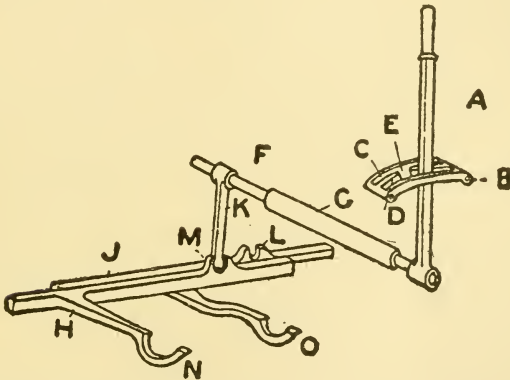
View of gear shifting lever, selector, and operating mechanism of a selective transmission. The parts are: A, gear shifting lever; C, D, slots in selector; E, gate; F, oscillating shaft; G, bearing for oscillating shaft; K, selector lever; M, L, selector lever slots; H, J, selector bars; N, O, fingers for shifting sliding gears.
